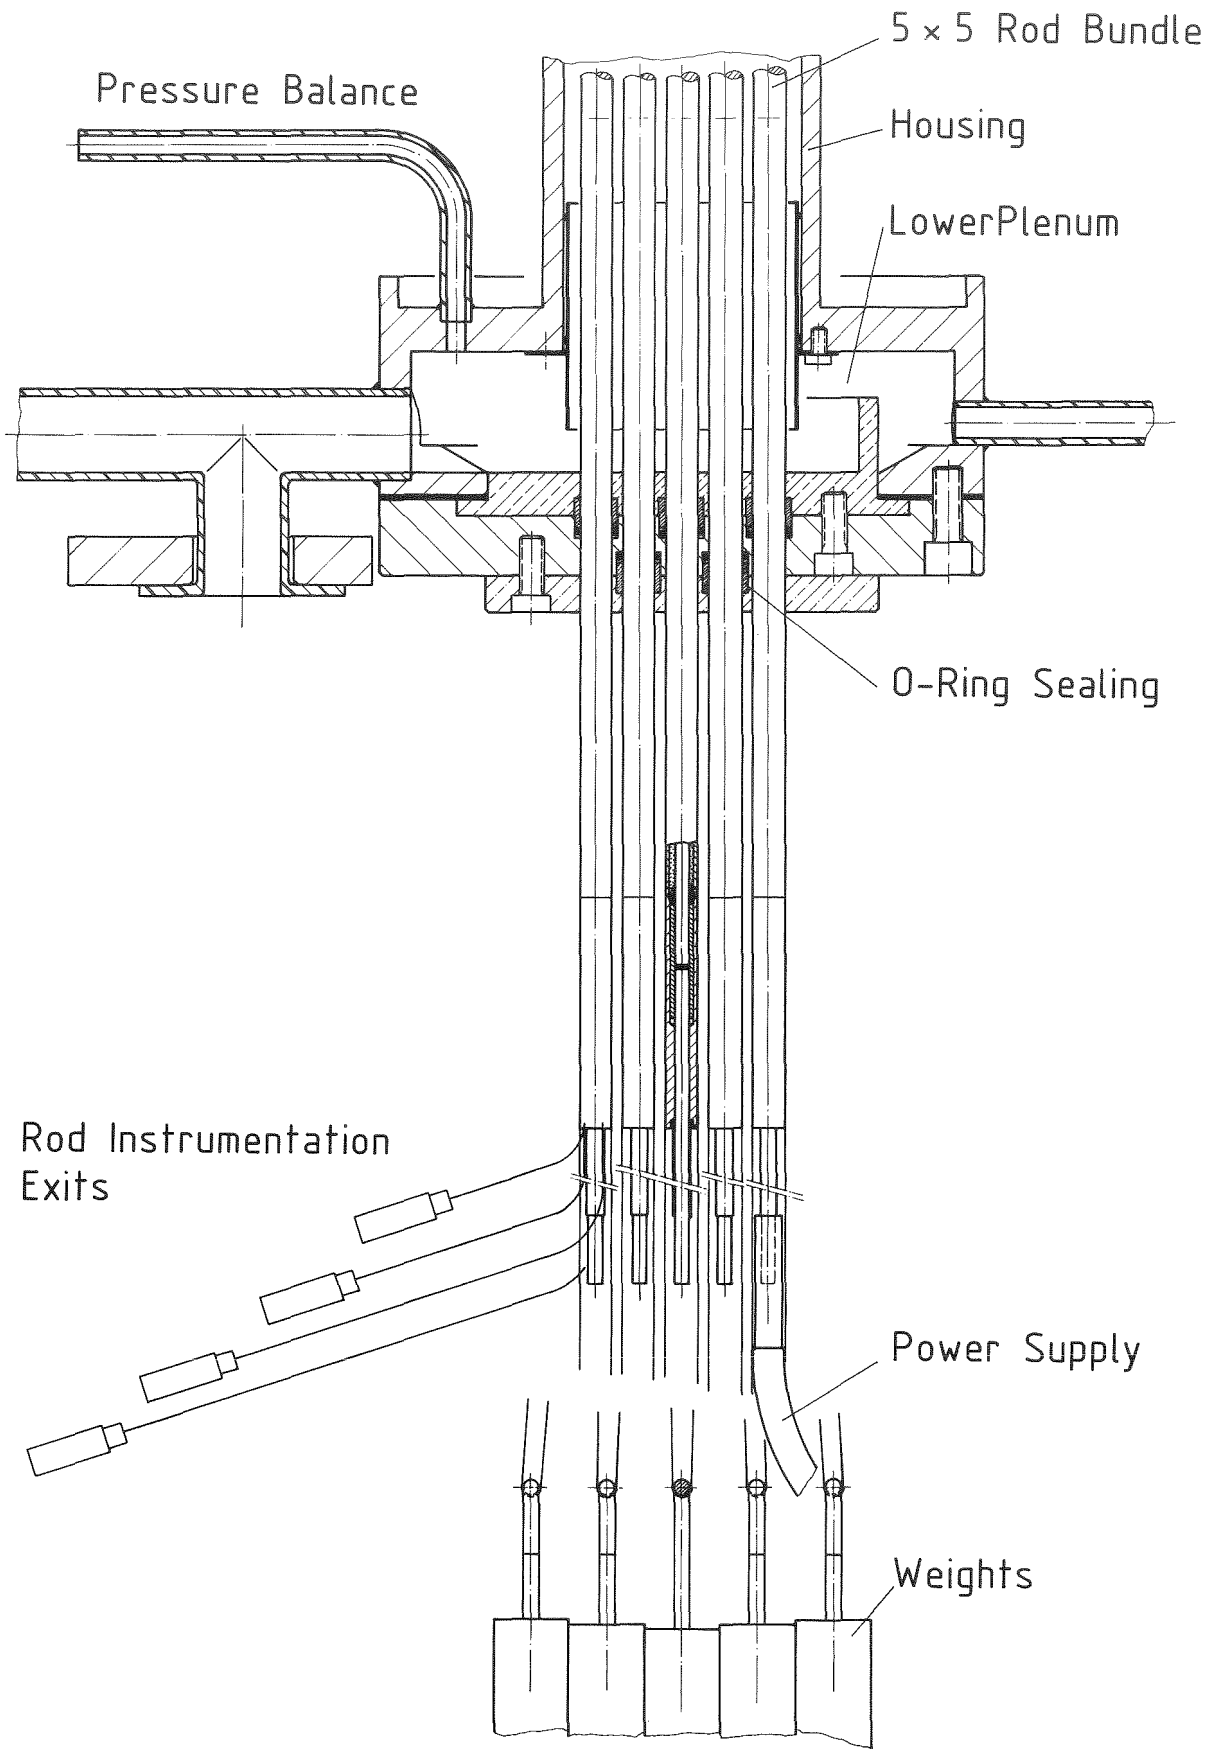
5x5 rod bundle: Lower bundle end and lower plenum
